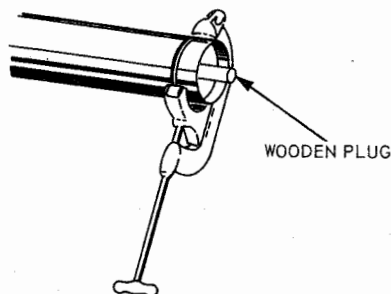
Tube Cutter With Single-Sided Wheel Used for Cutting Rigid Coaxial Line
